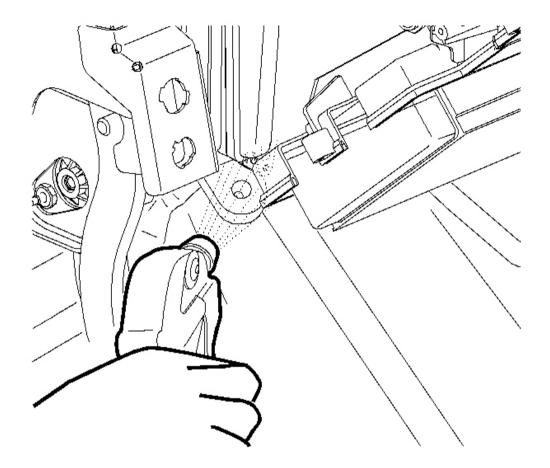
Heater Core Pipe Cover Courtesy of GENERAL MOTORS CORP.
